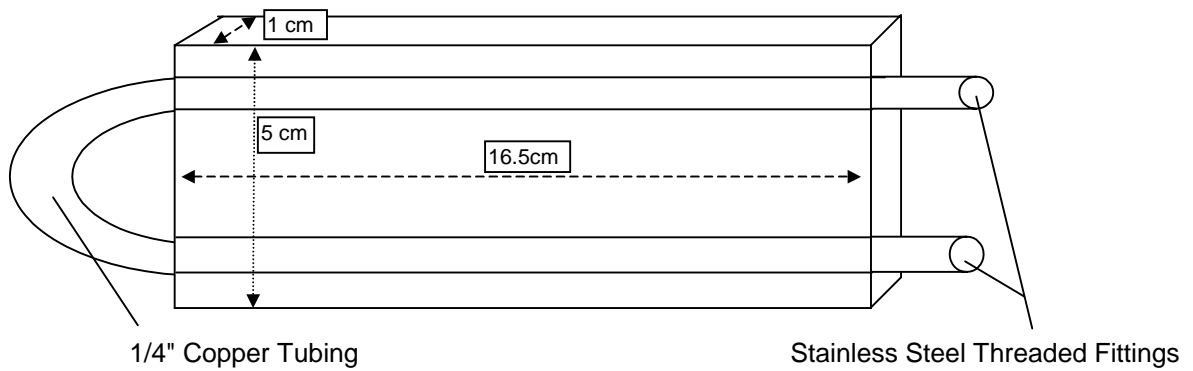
Aluminum Spreader with Copper Cooling Tubes
